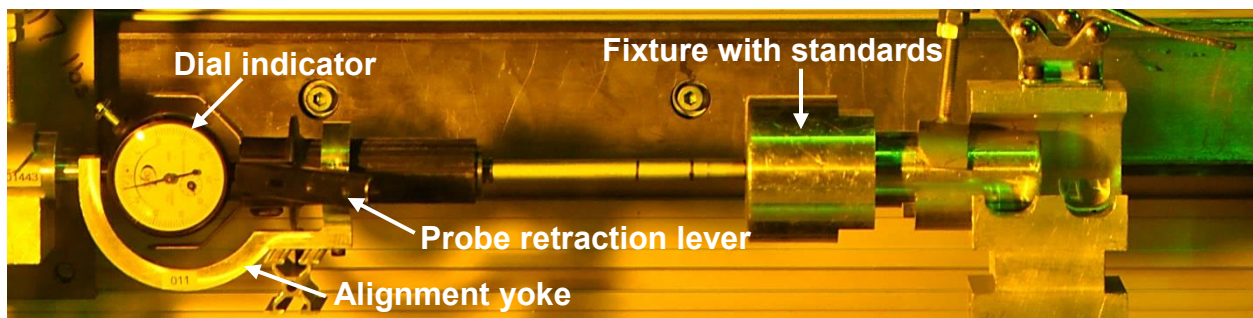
Performing a verification on the small bore gauge (used in graphite holder holes).
